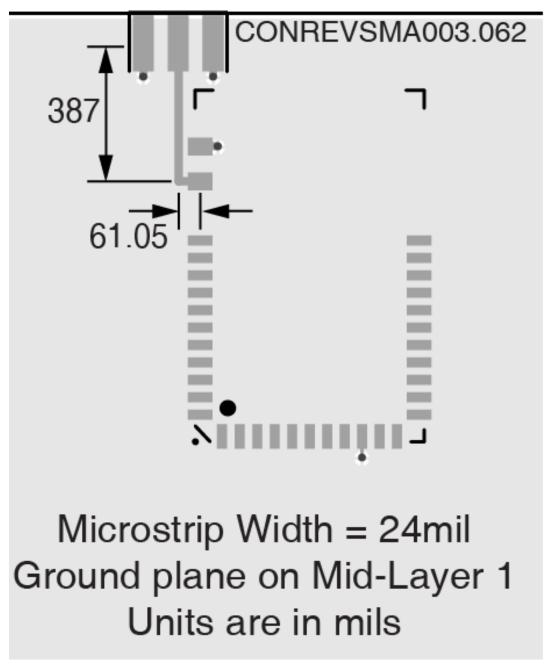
Trace Dimensions for Edge Mount RP-SMA Connection
